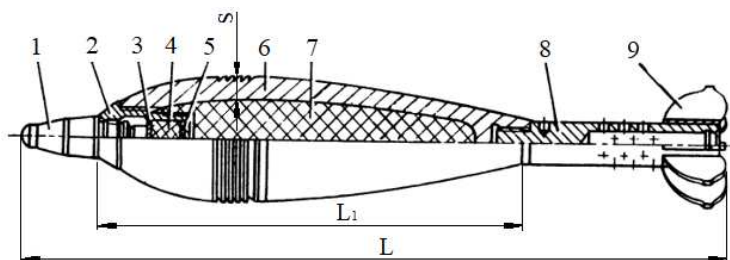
120 mm high-explosive fragmentation mortar ammunition [2]. 1. Fuse, 2. Fuse adapter, 3. O-ring, 4. Detonator, 5. Carboard spacer, 6. Cast iron body, 7. Explosive filler, 8. Steel tail boom, 9. Stabilizing fins
